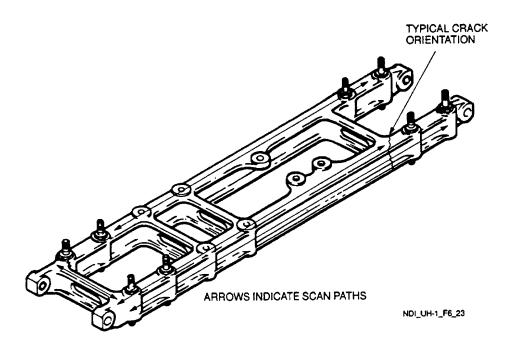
Support Assembly, Hydraulic Cylinder Assembly (Port).
